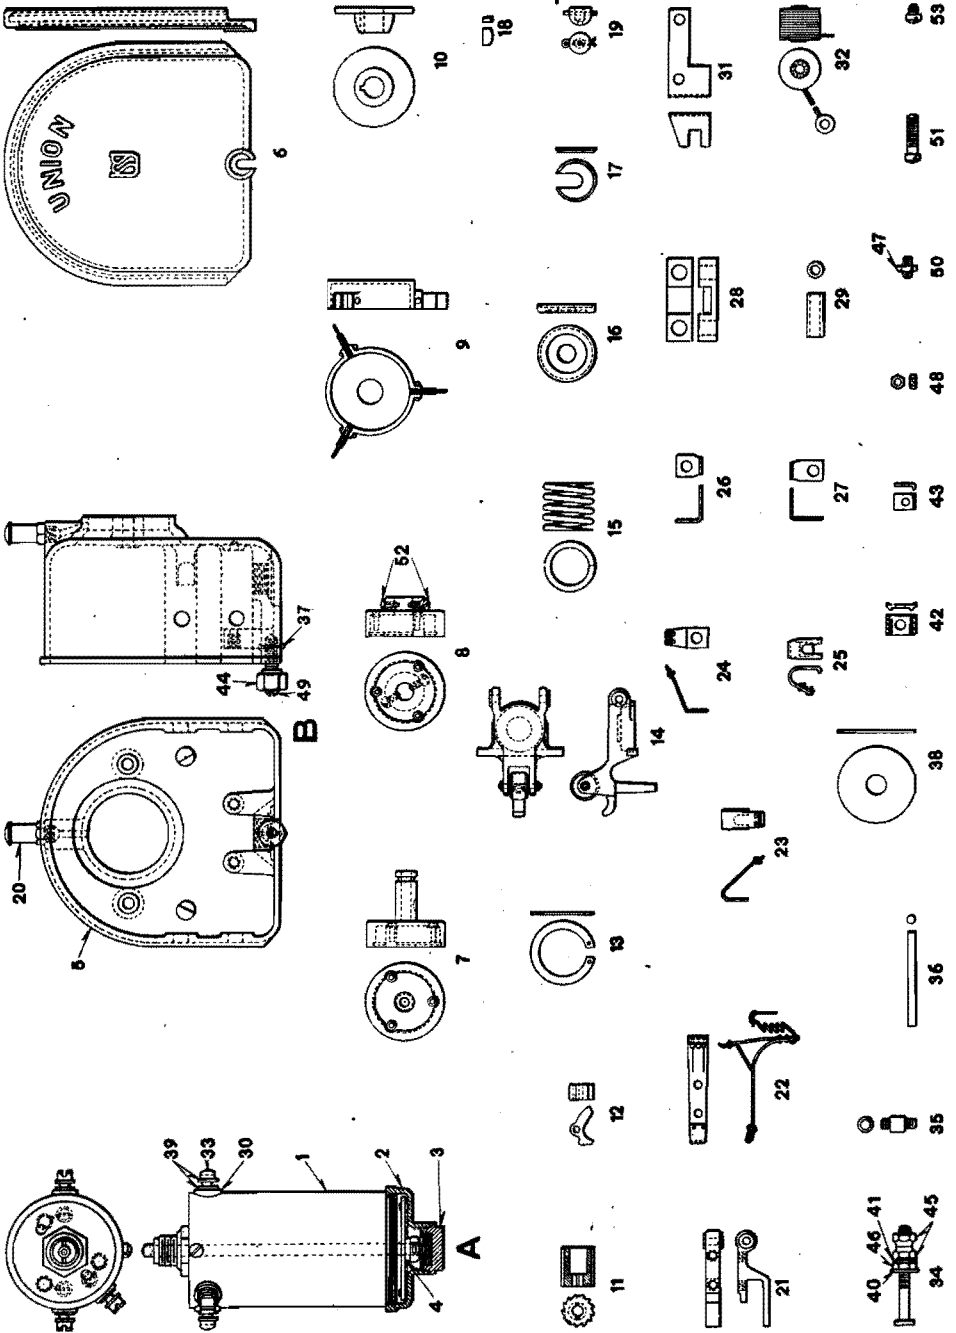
DETAILS OF D. C. MOTOR FOR RIGHT HAND UPPER OR LOWER
